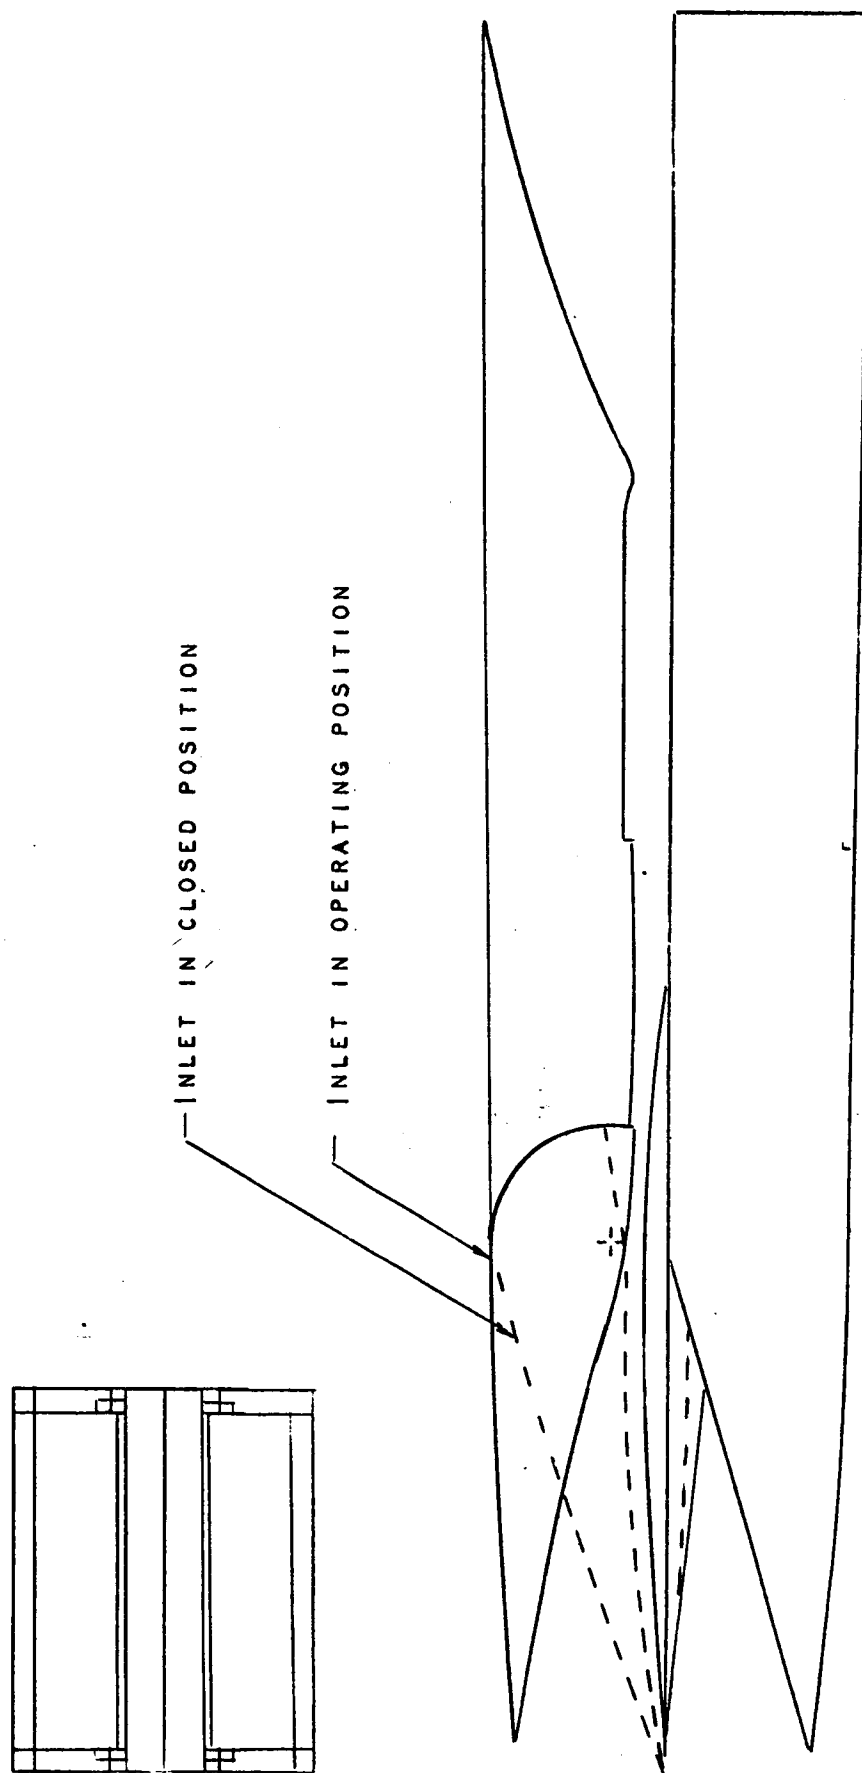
TWO-DIMENSIONAL BURNER CONCEPT — ROTATING COWL
